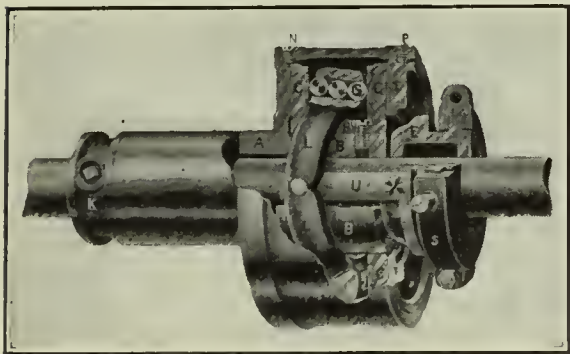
SECTIONAL VIEW OF THE AKRON CLUTCH COUPLING
